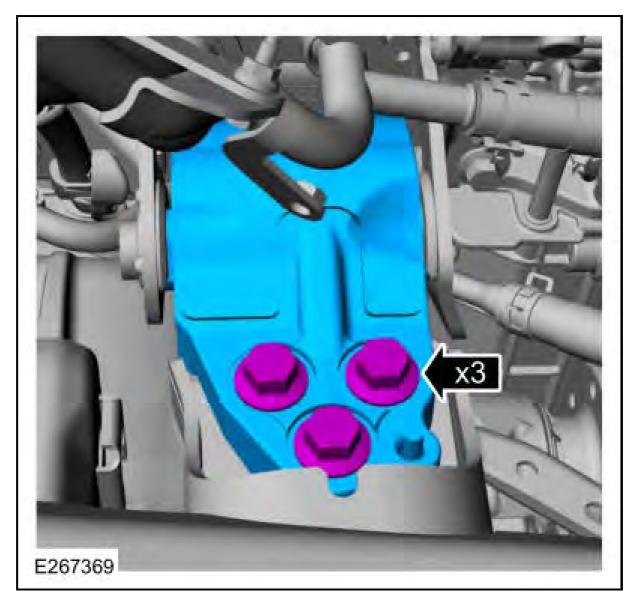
Engine Mount Bracket Tightening Sequence LH Courtesy of FORD MOTOR COMPANY
